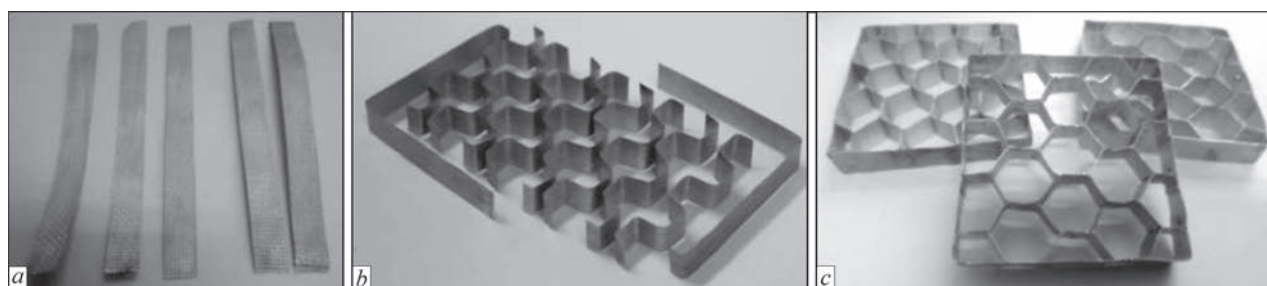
Stages of manufacturing honeycomb filler: a — strips of bimetall Al-Ti material; b — workpieces of profiled strips for spot welding of a honeycomb filler; c — 72×72 mm honeycomb filler
